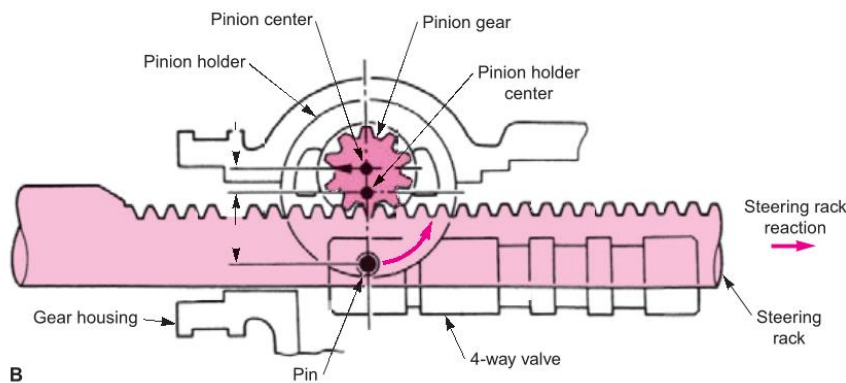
Rack-and-pinion steering system cutaway showing the pinion shaft and the rack (Auto Suspension and Steering, A4, 3rd Edition, p. 177)
